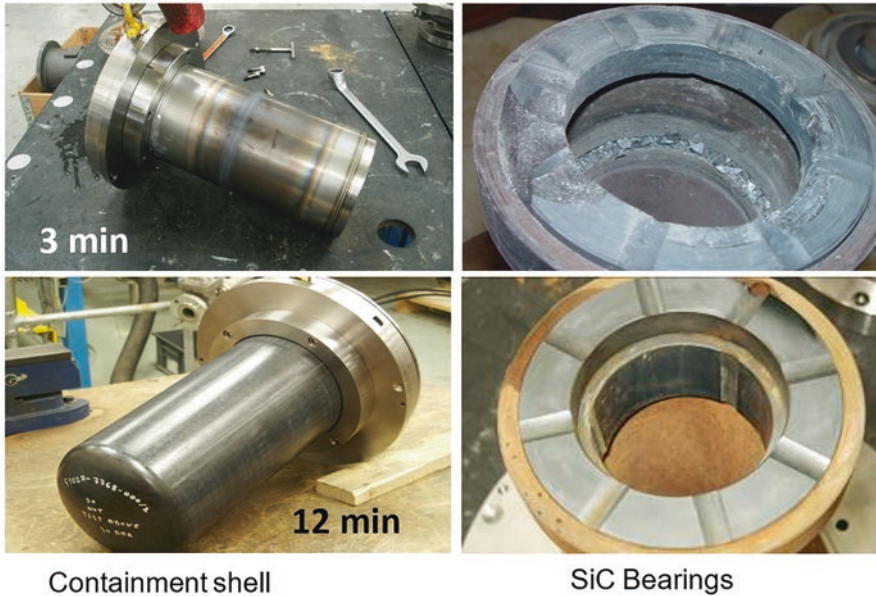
Top section: Damaged metallic shell and SiC Bearing after a 3-min dry running test. Bottom section: Undamaged Xycomp® shell and intact SiC Bearing after a 12-min dry running test
